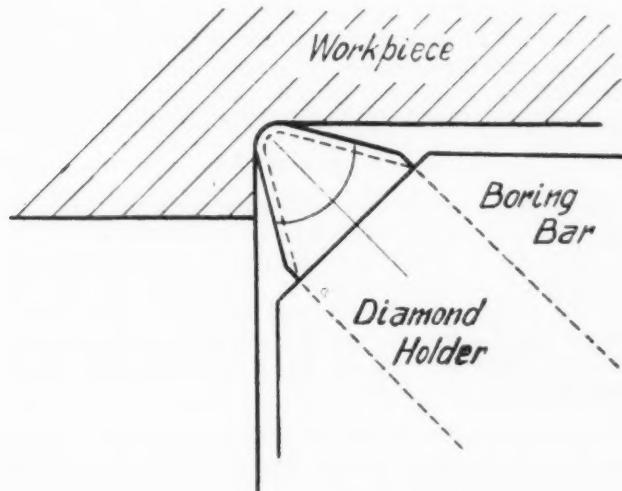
DIAMOND EDGE OF BORING TOOL LIMITED TO SMALL RADIUS AND ABOUT 80 DEG INCLUDED ANGLE
